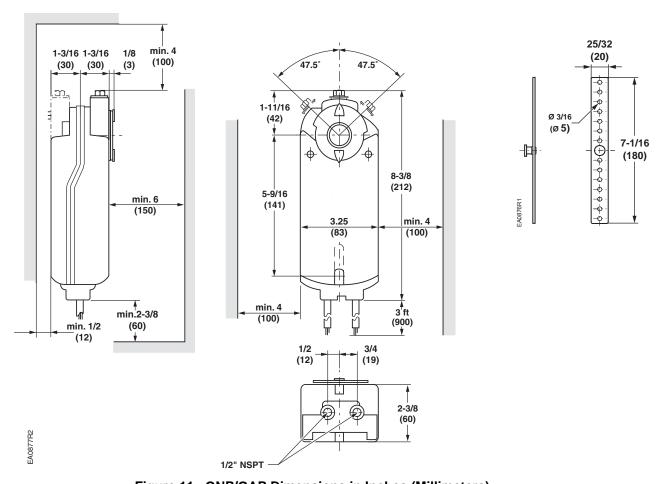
GNP/GAP Dimensions in Inches (Millimeters).
